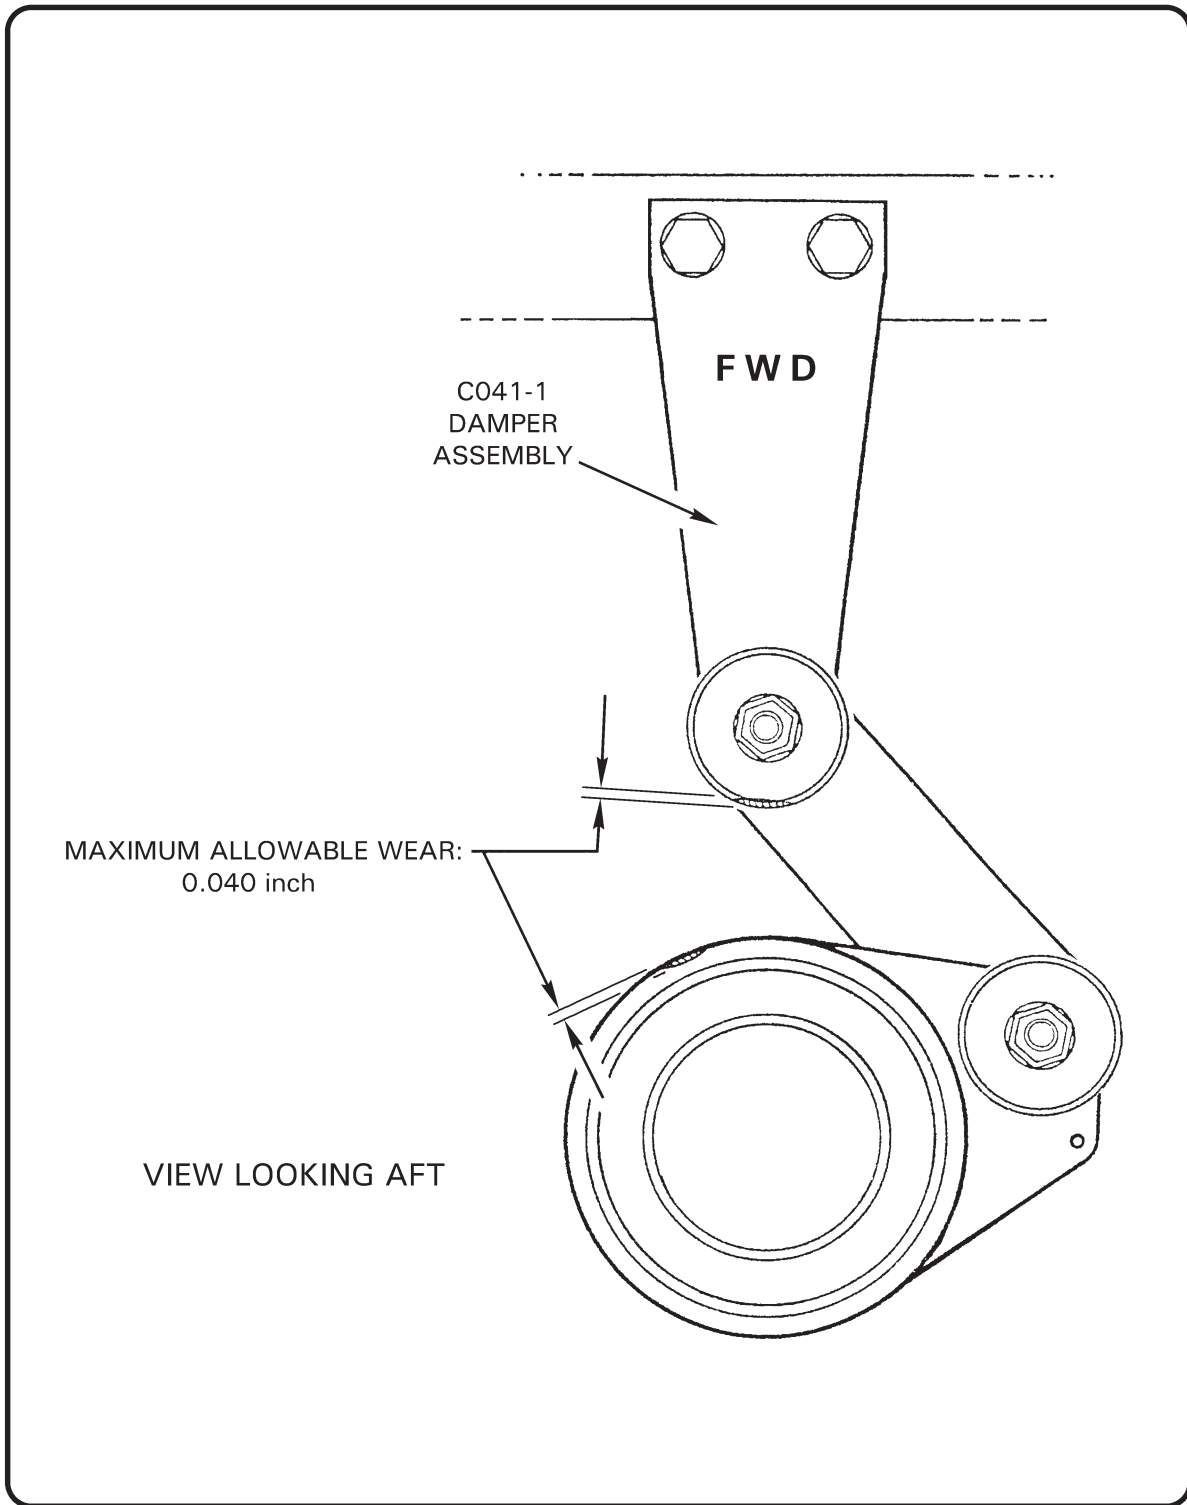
TAIL ROTOR DRIVE SHAFT DAMPER BEARING INSPECTION
